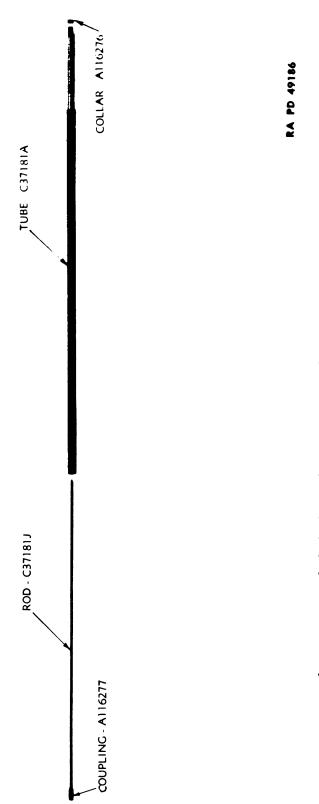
Exploded View of Extension Staff Assembly (2-inch Star Gage)
